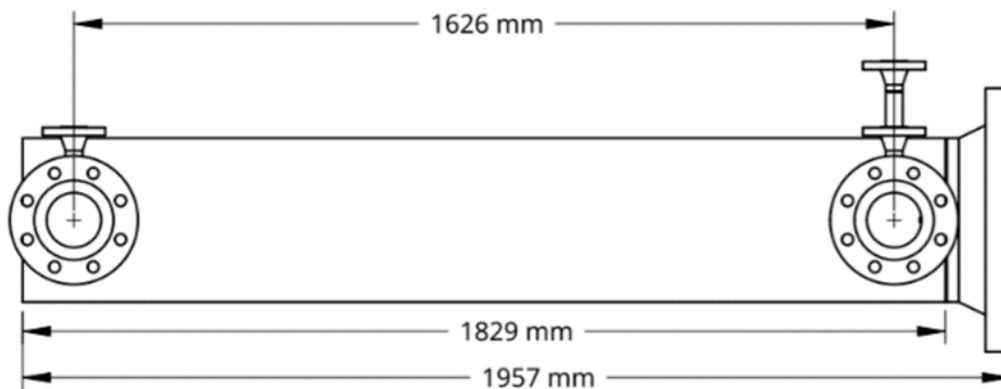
The center-to-center measurement between two flanges on a pressure vessel assembly
